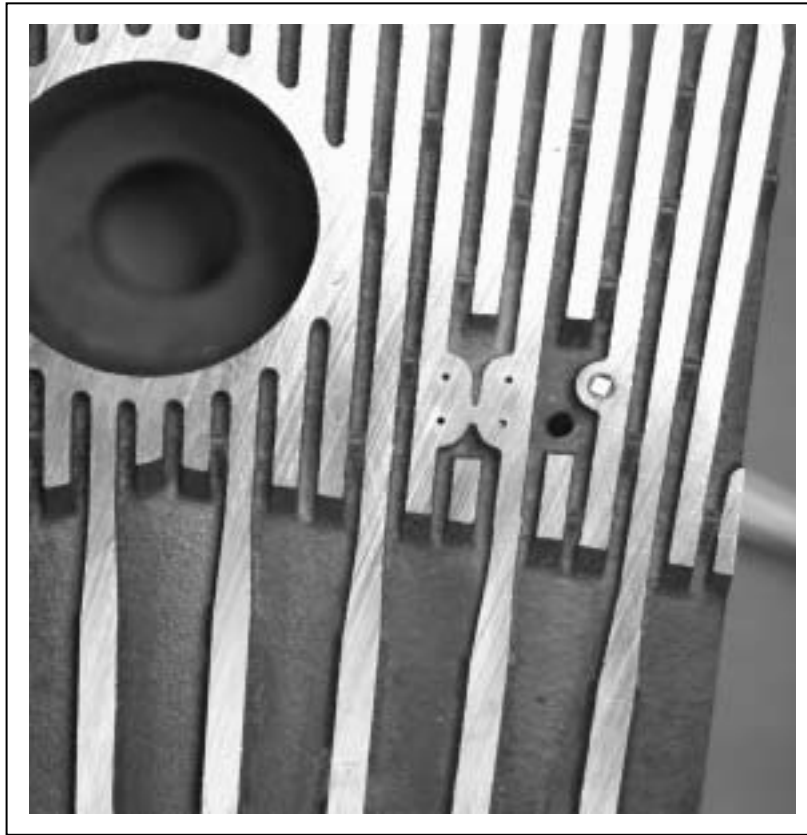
The modified part of the stator plate equipped with the piezoresistive transducers used in the first mill-scale experiment.
